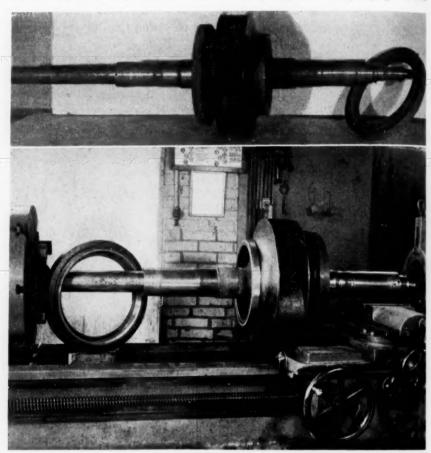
20-Inch Pump Rotor; before (above) and after (below) restoring sleeve and wearing ring surfaces
